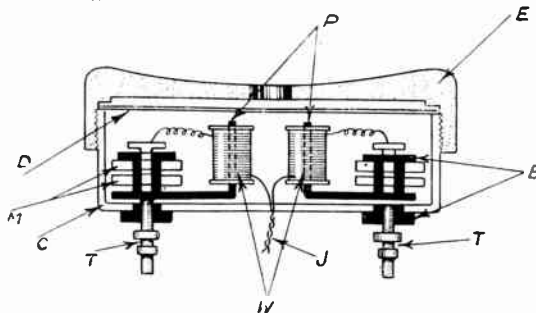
THE COMPONENTS OF A MAGNETIC DIAPHRAGM TYPE OF RECEIVER.
